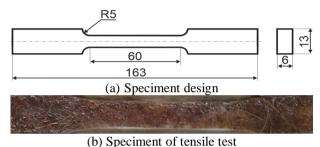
ASTM D 638-03 composite tensile test specimens.
